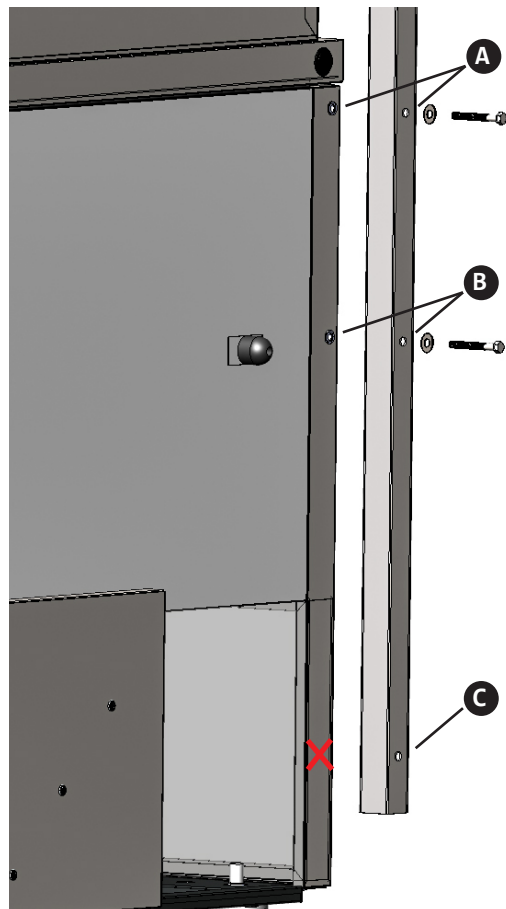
Mark the location of hole C on the unit. Open-backed unit shown.
